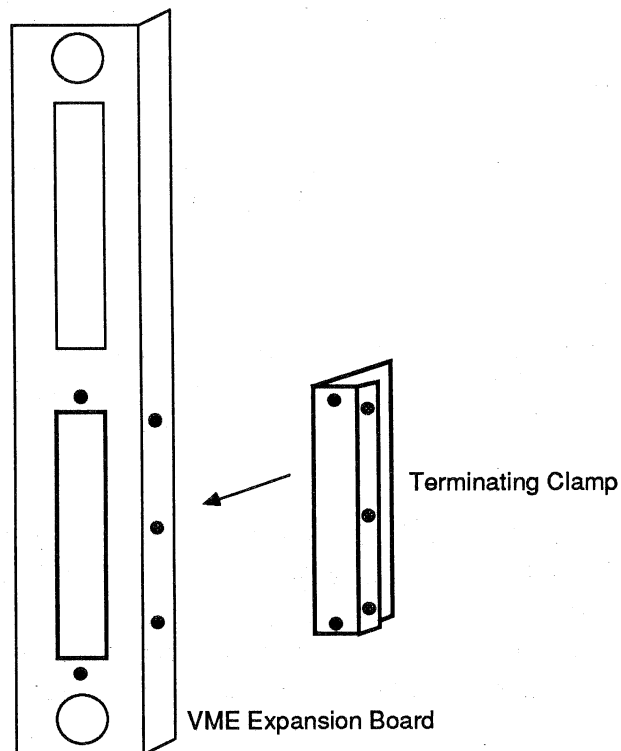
Metal Terminating Clamps, VME Expansion Board
